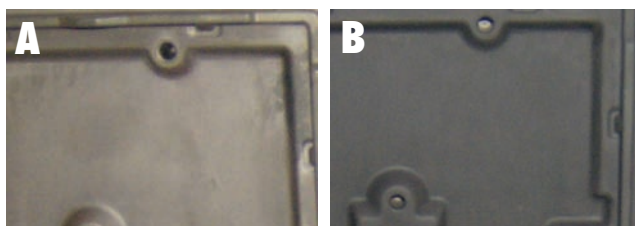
(a) Anodize on die casting; (b) Black Anodize + ARP on die casting.
